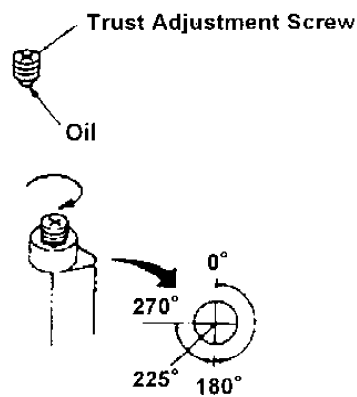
Adjustment of Thrust Adjustment Screw
